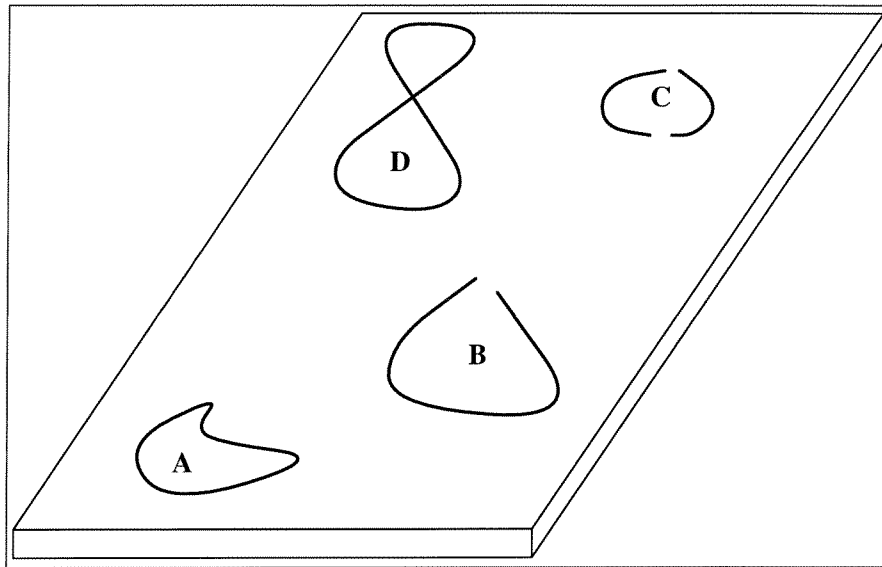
(A) possible hole shape; impossible hole shapes (B), (C), and (D).
